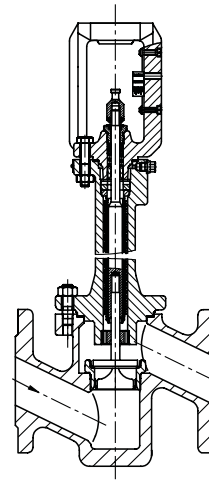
· Type 3241 Valve, forged steel version, 1/2" to 3" with insulating section
